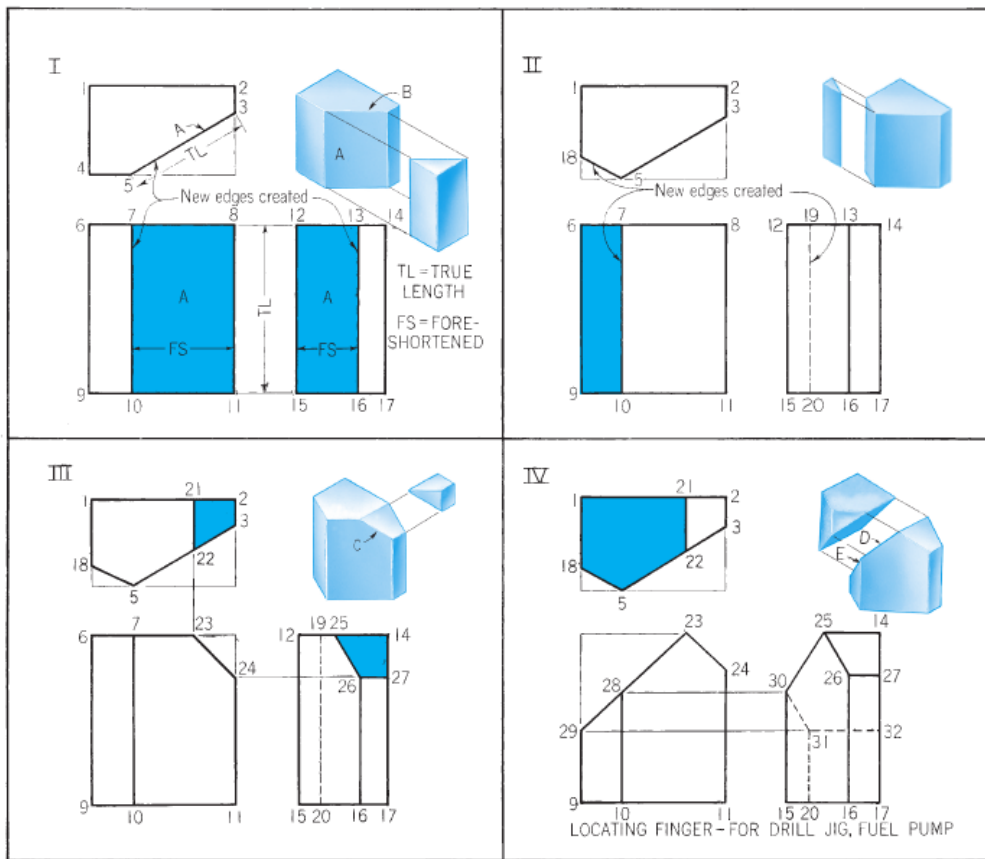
Machining a Locating Finger—Inclined Surfaces.
